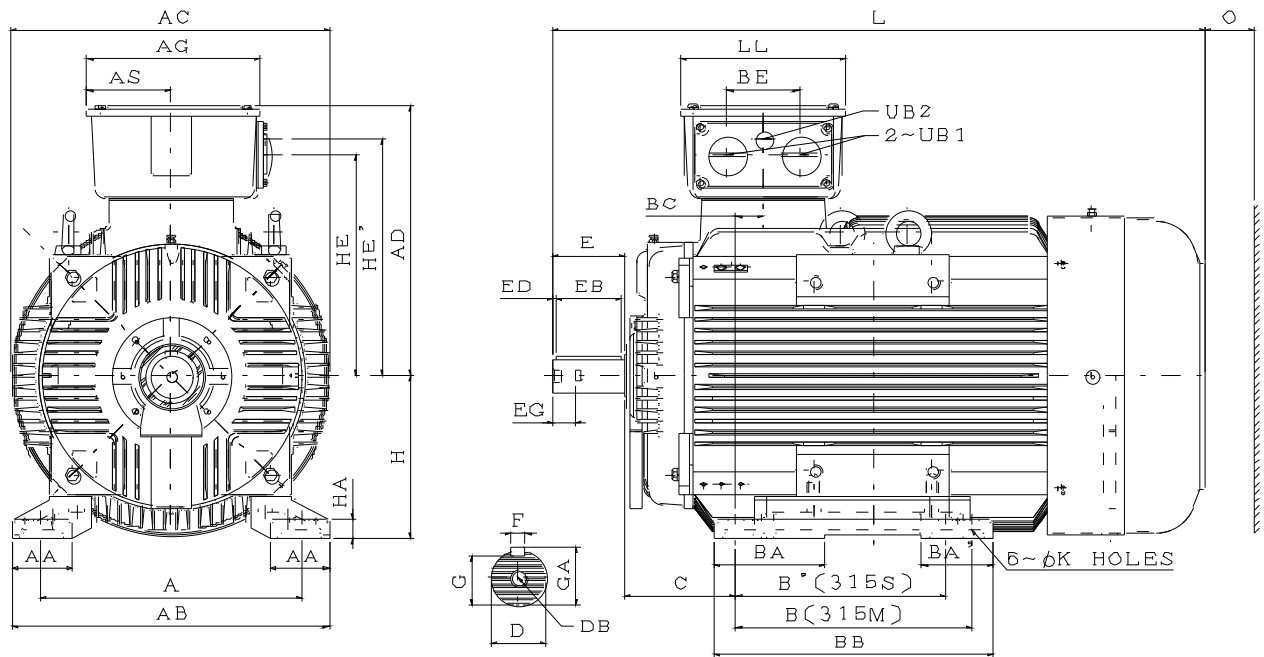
Outline drawing of cast iron design, feet version, mounting B3; frame size 315S – 315M (sample)
